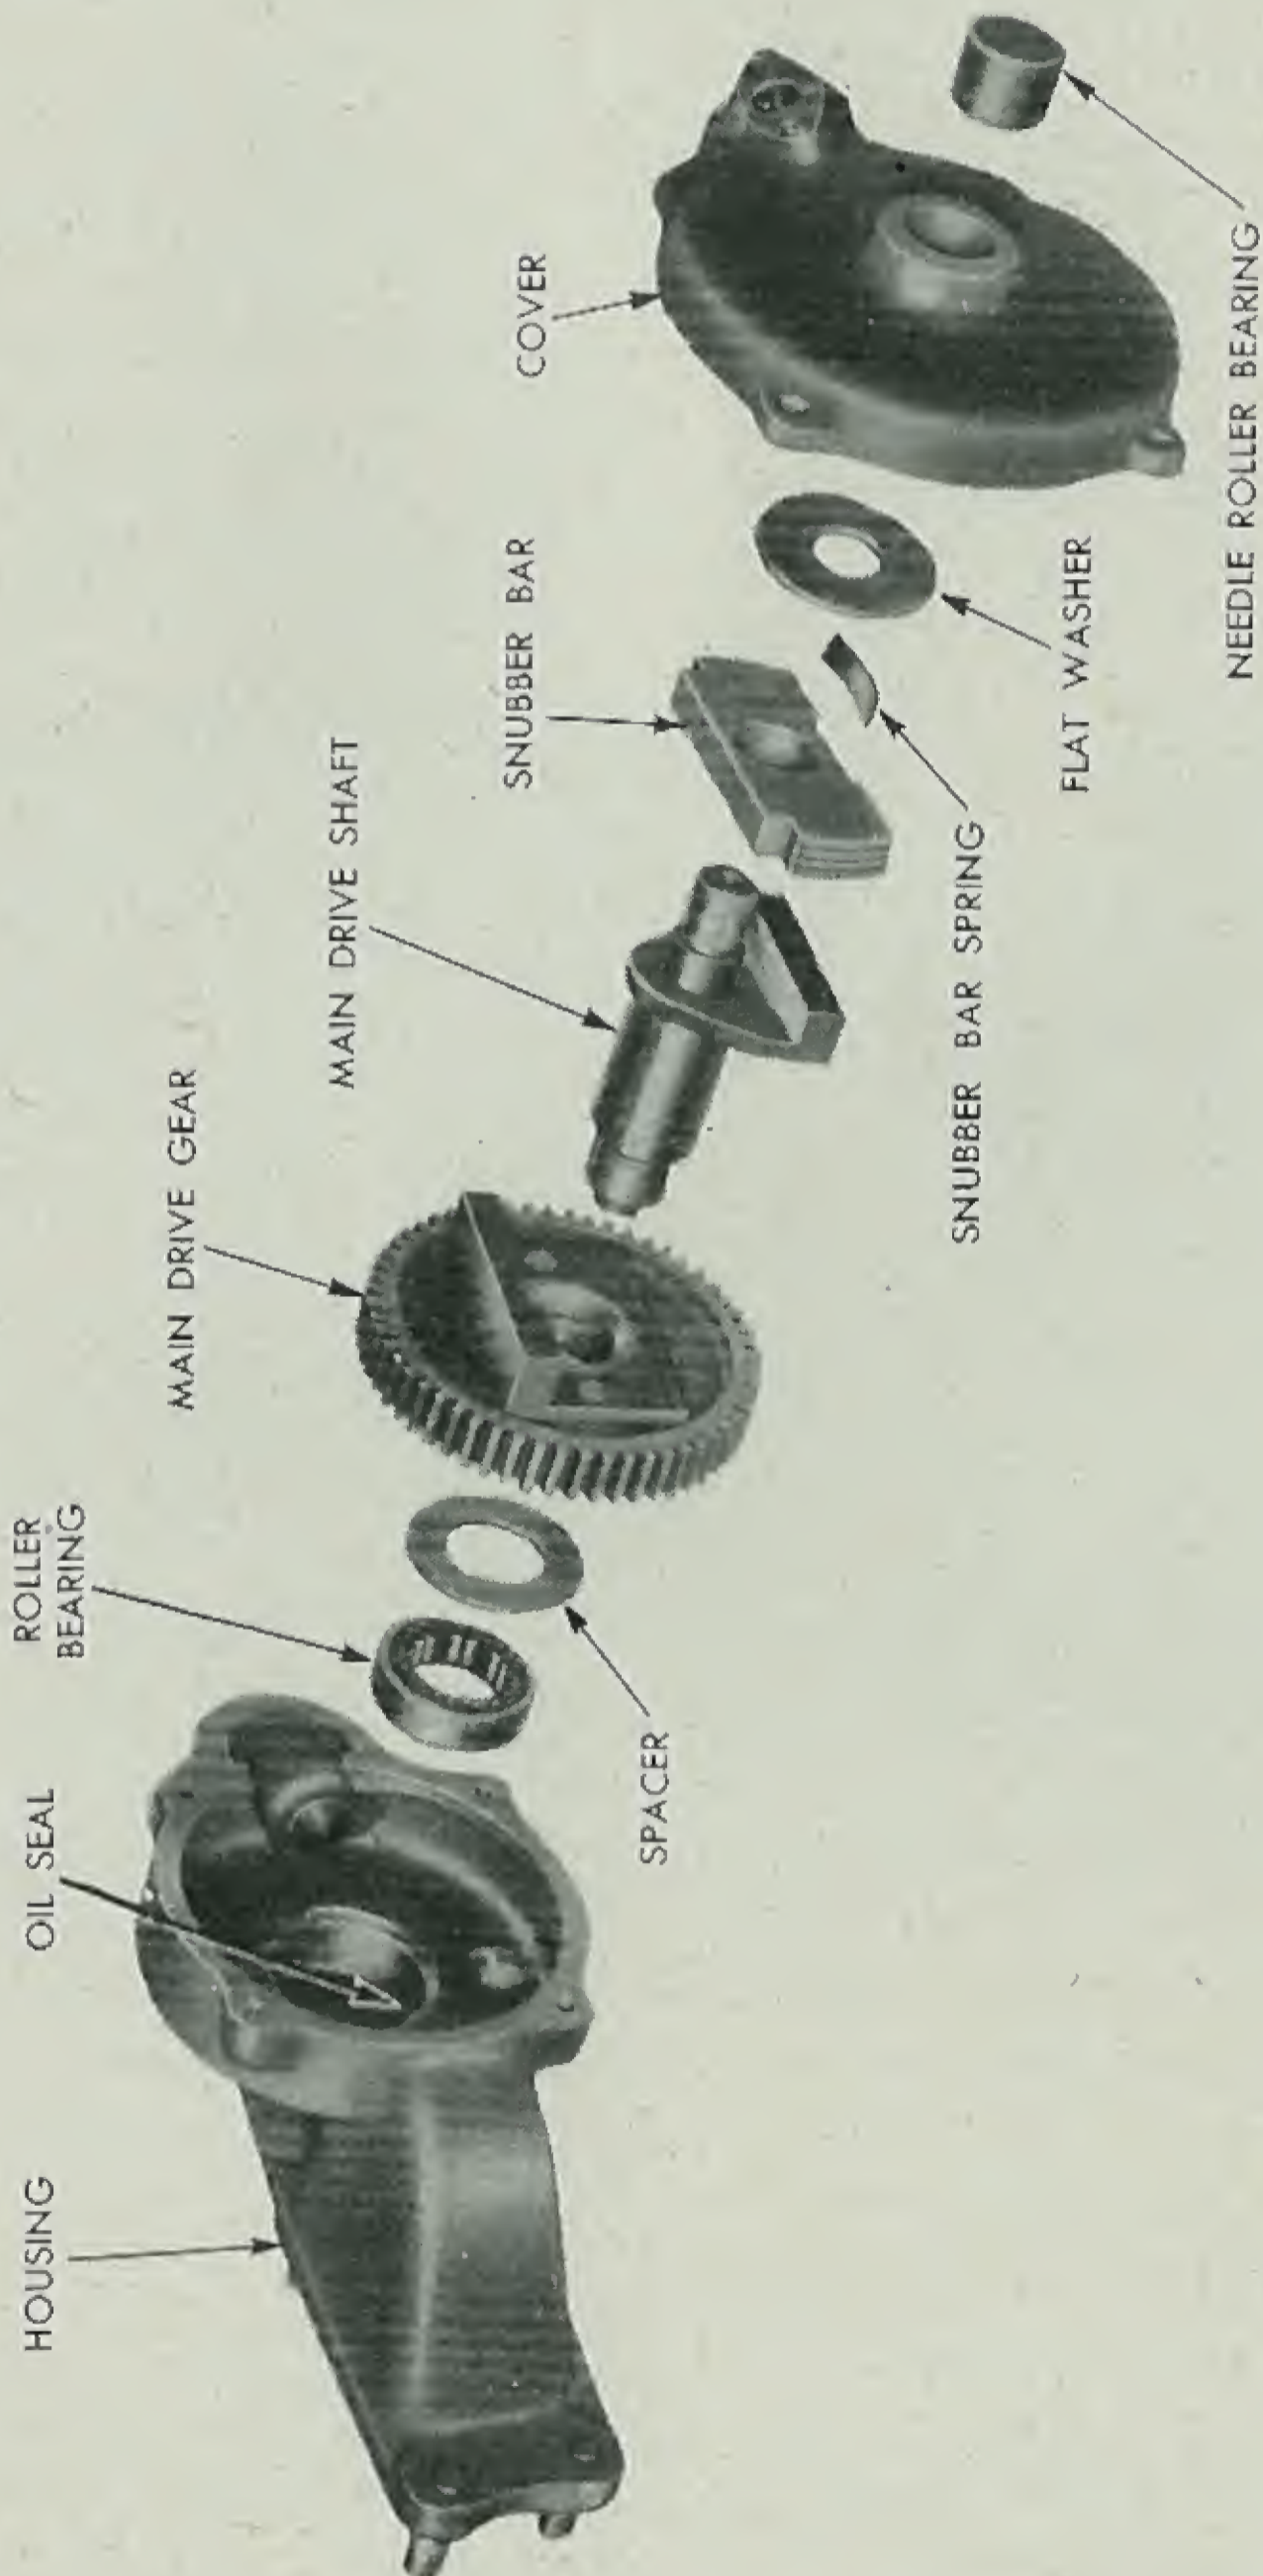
Single-speed Traversing Mechanism, Main Drive Shaft, Disassembled
